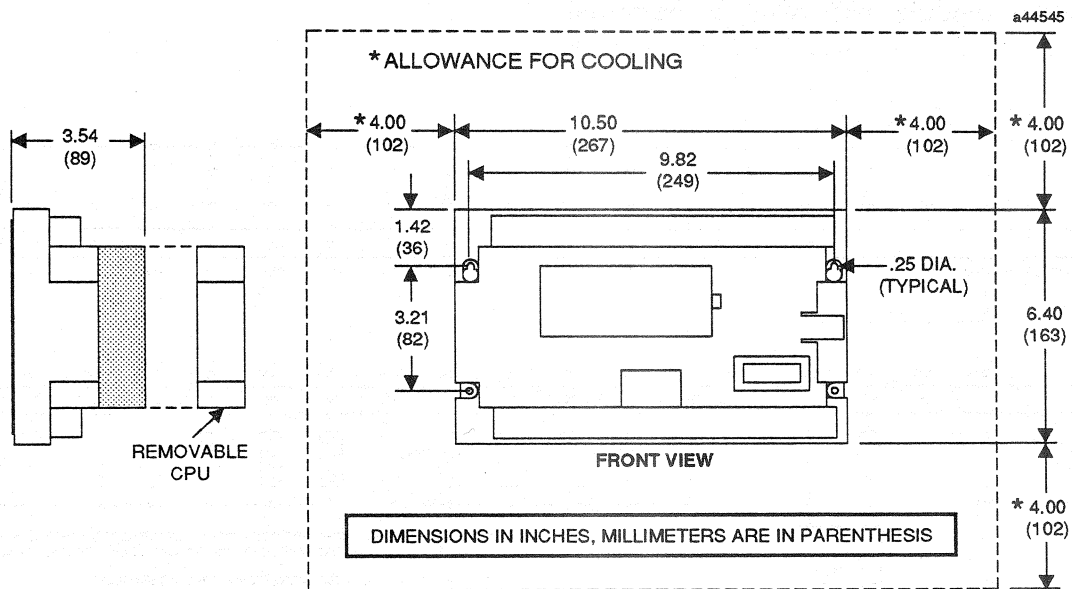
Baseplate Mounting Dimensions and Spacing Requirements
